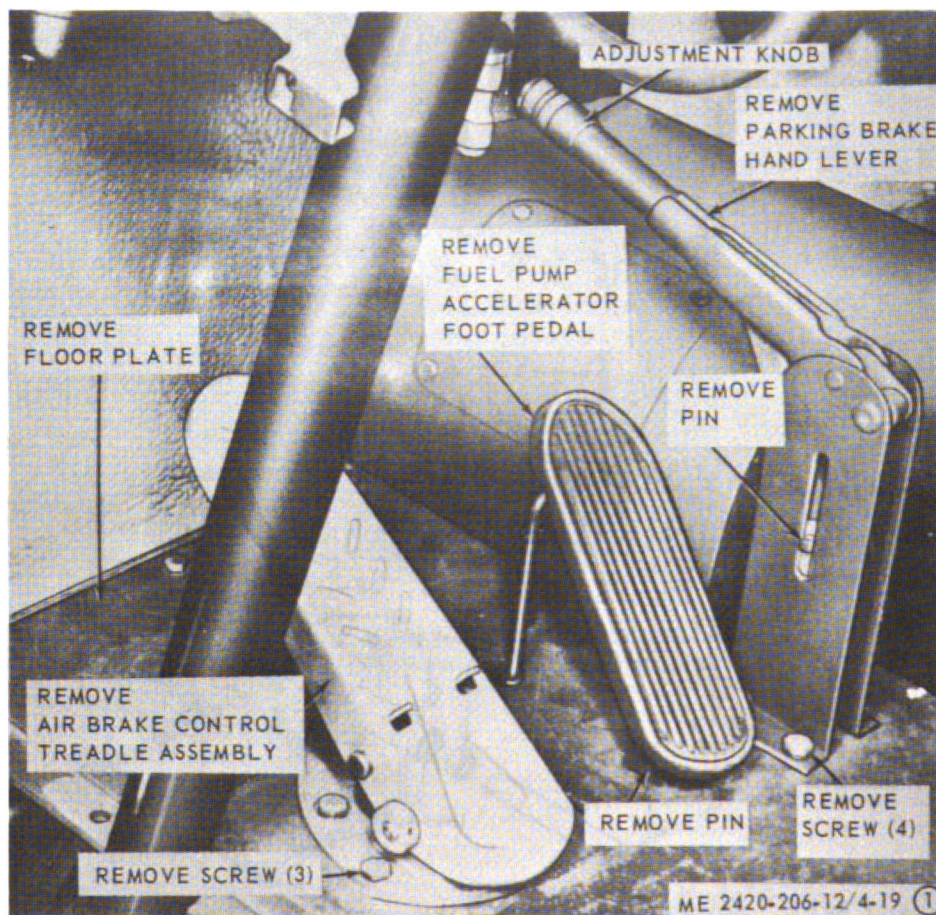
Parking brake hand lever and cable, removal and installation (sheet 1 of 2).
